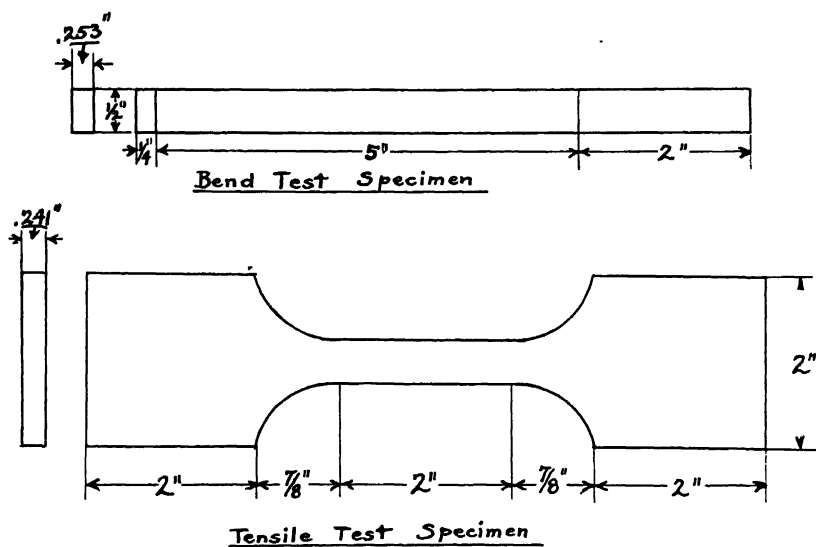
DIMENSIONS OF TEST SPECIMENS.
